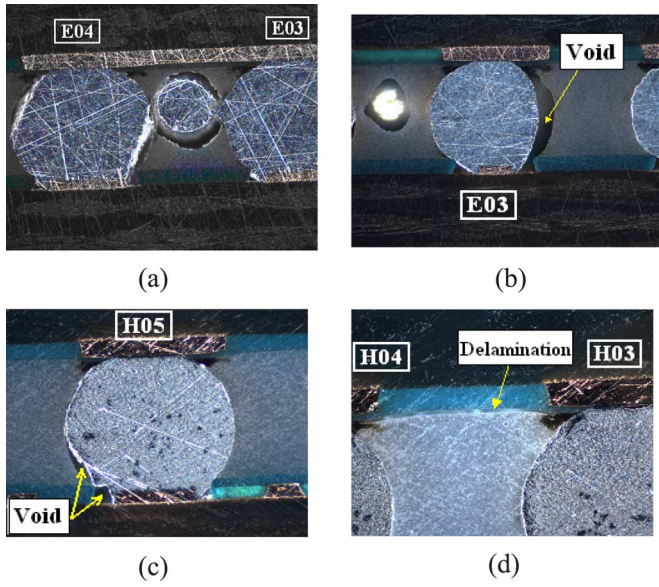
Cross-sectional images of FC-CSP with UF-A. (a) E04 and E03 solder balls at a cross section. (b) E03 solder ball at deeper section. (c) H05 solder ball. (d) Between H04 and H03 solder balls.
